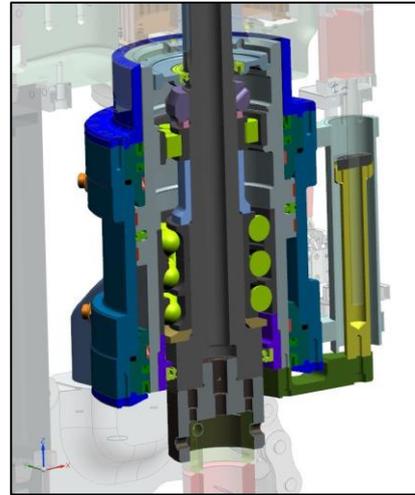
Cross-section of the WC4 Boss Welding Machine spindle arrangement
